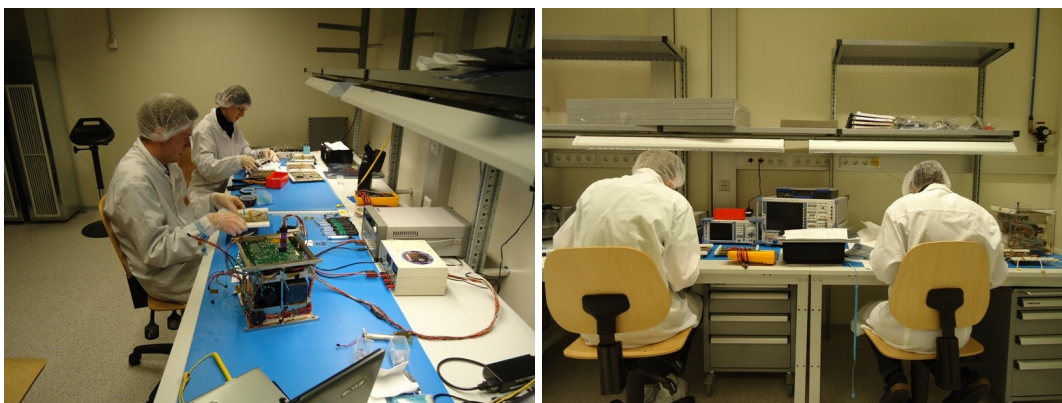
Cleanroom area for flight assembly: The flight assembly of the spacecraft was performed in a cleanroom environment.
